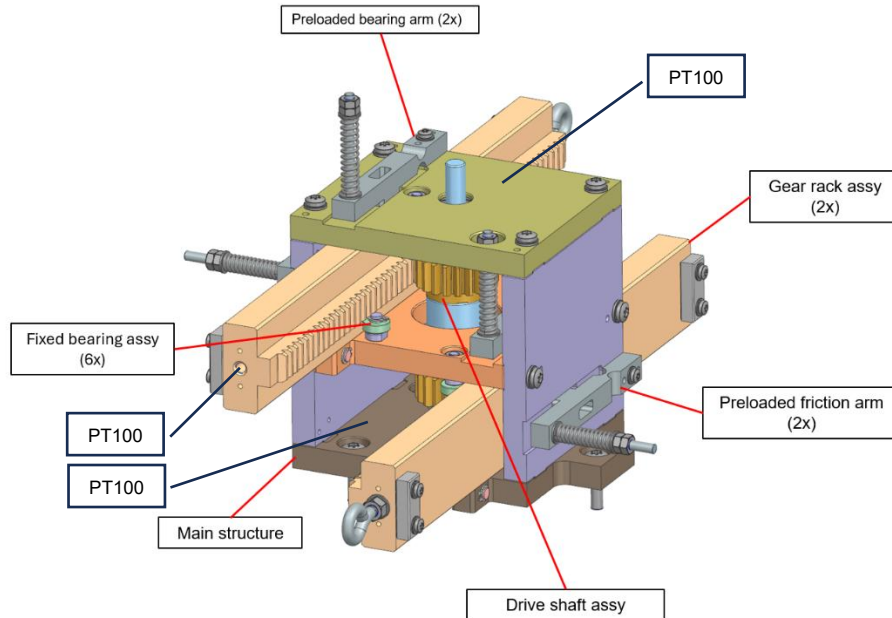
The cold drive unit. It consists of a shaft containing 2 pinions that each drive a single gear rack. The friction between the pinion and gear rack and therefore the torque on the drive shaft, is set by preloading the bearings of the preloaded friction arms that push against the gear racks.
